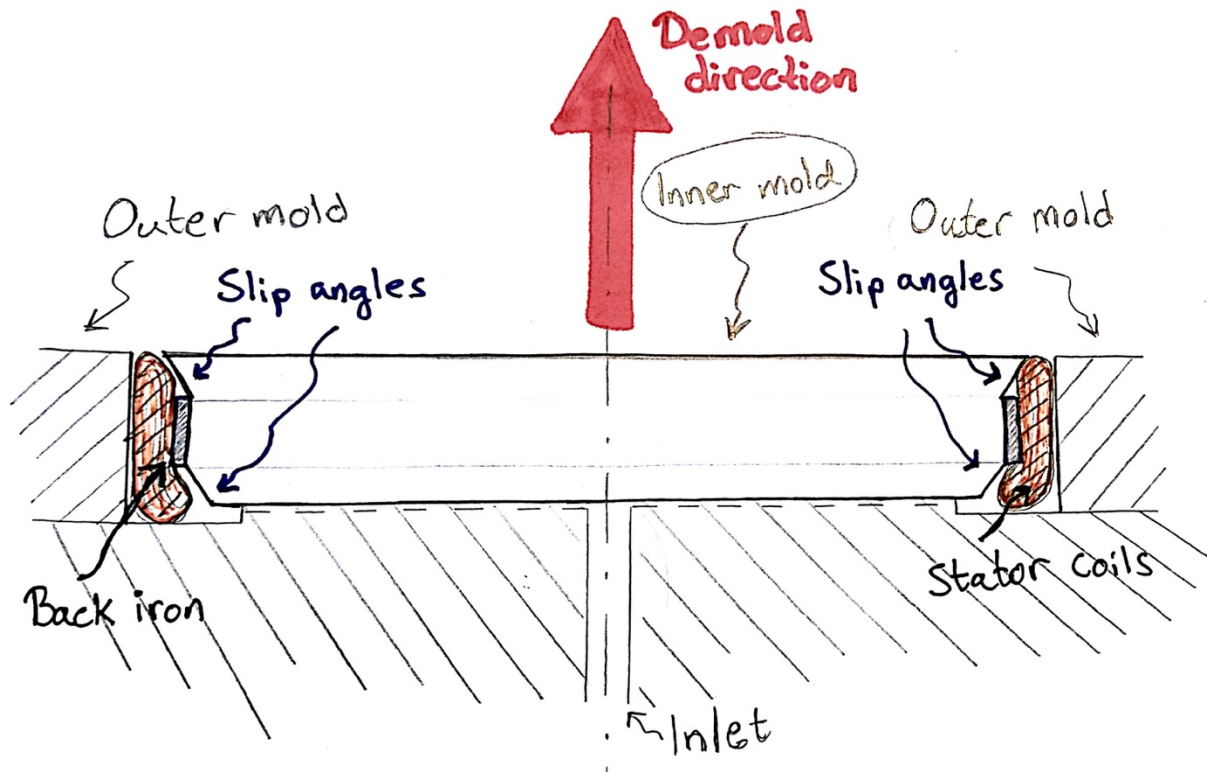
The Mold Construction with Inner Mold Slip Angles
